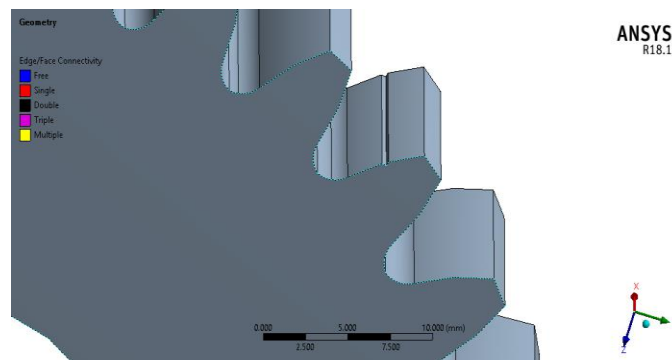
A Fracture Sun Gear Modeling (Initial Crack)
